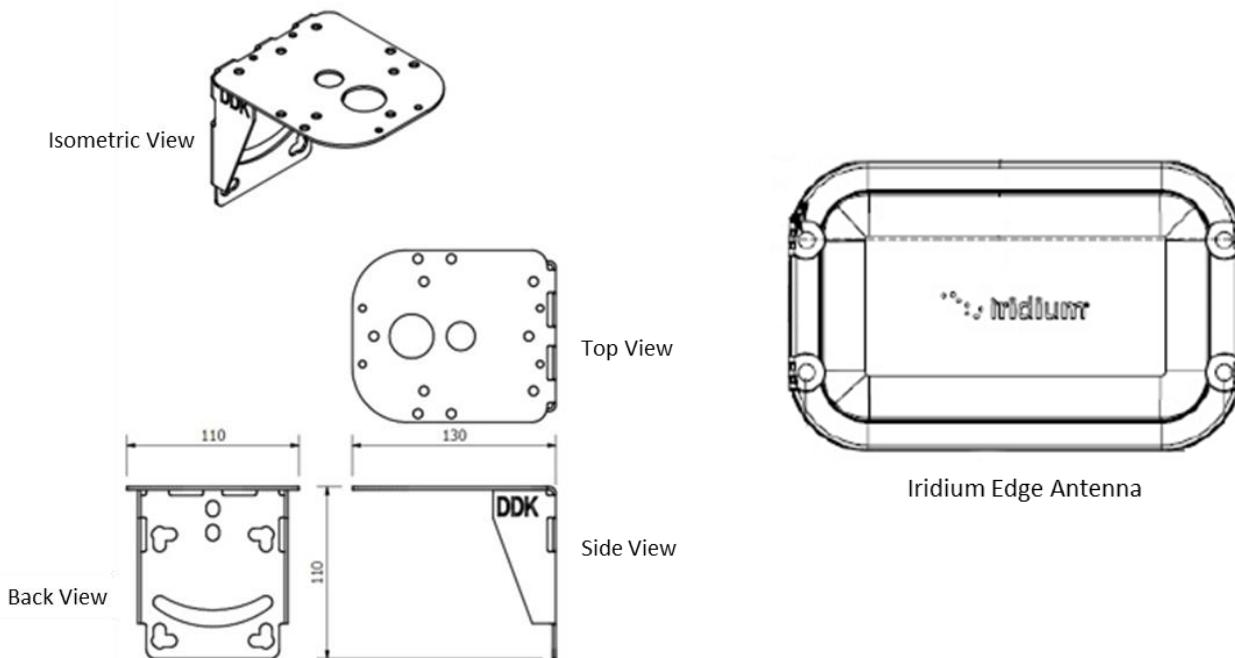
Universal Mounting Bracket and Iridium Edge Antenna
